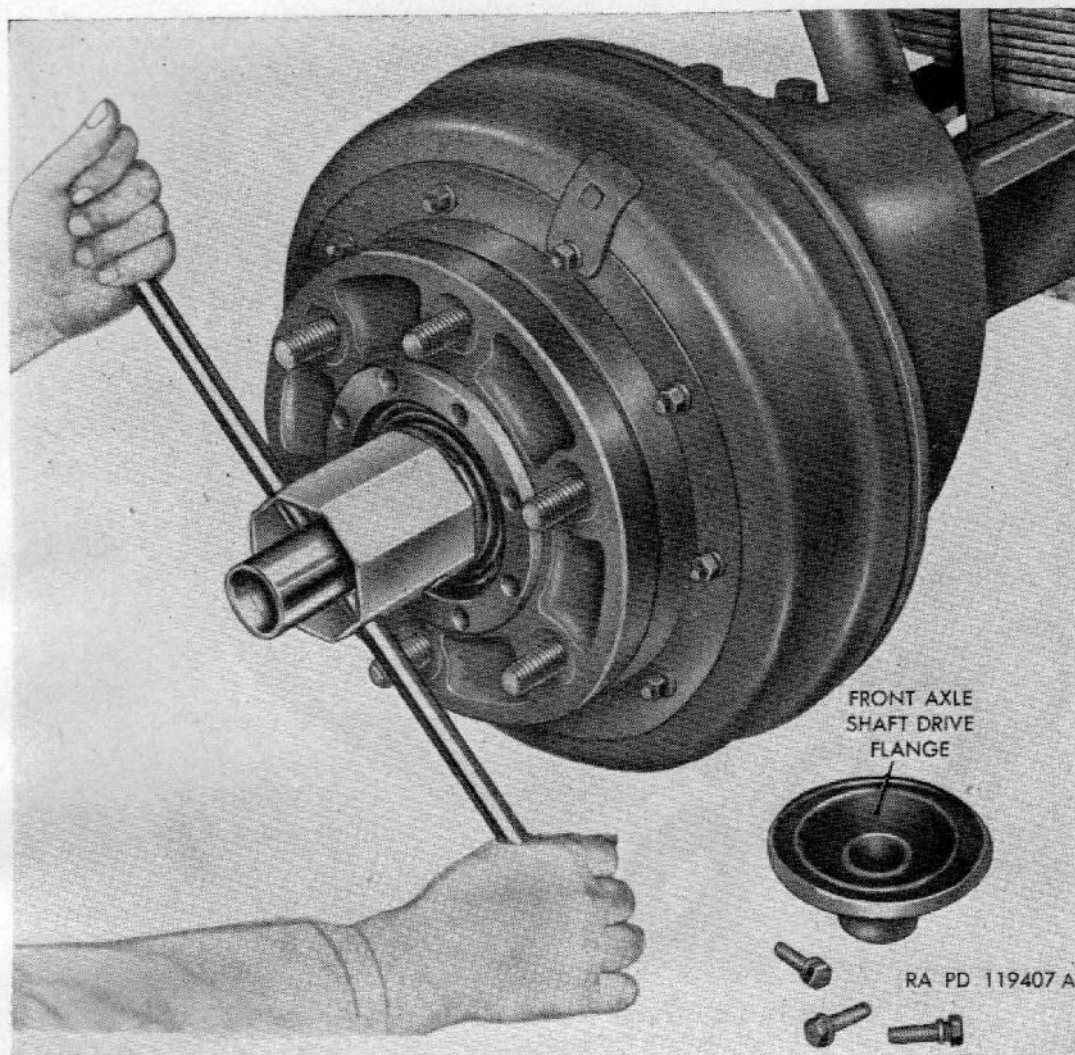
Adjusting wheel bearings using wrench 41-W-3748-75.
